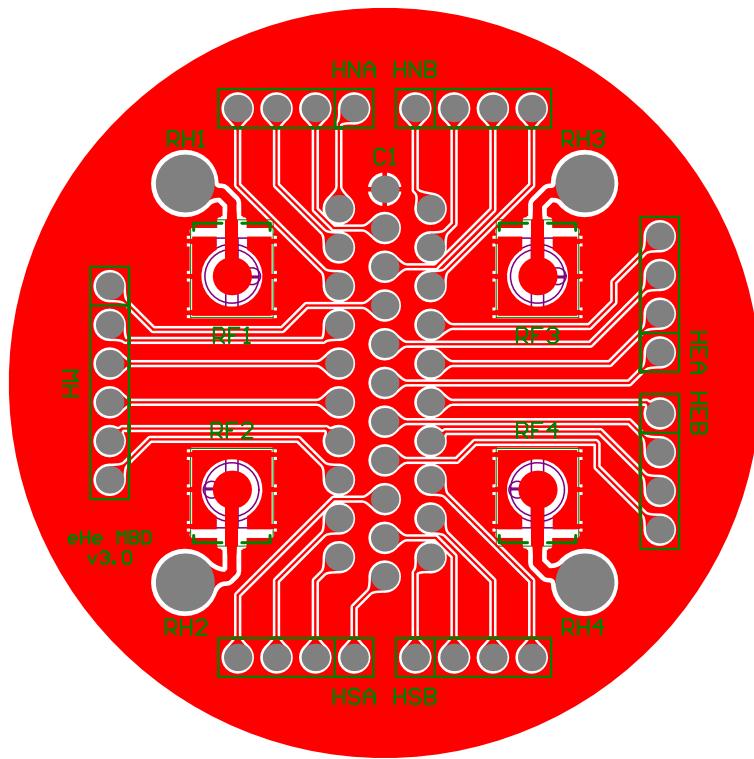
The PCB design and layout of the Motherboard. Red represents the top copper. The widths of the traces were a nominal 0.15 mm.
